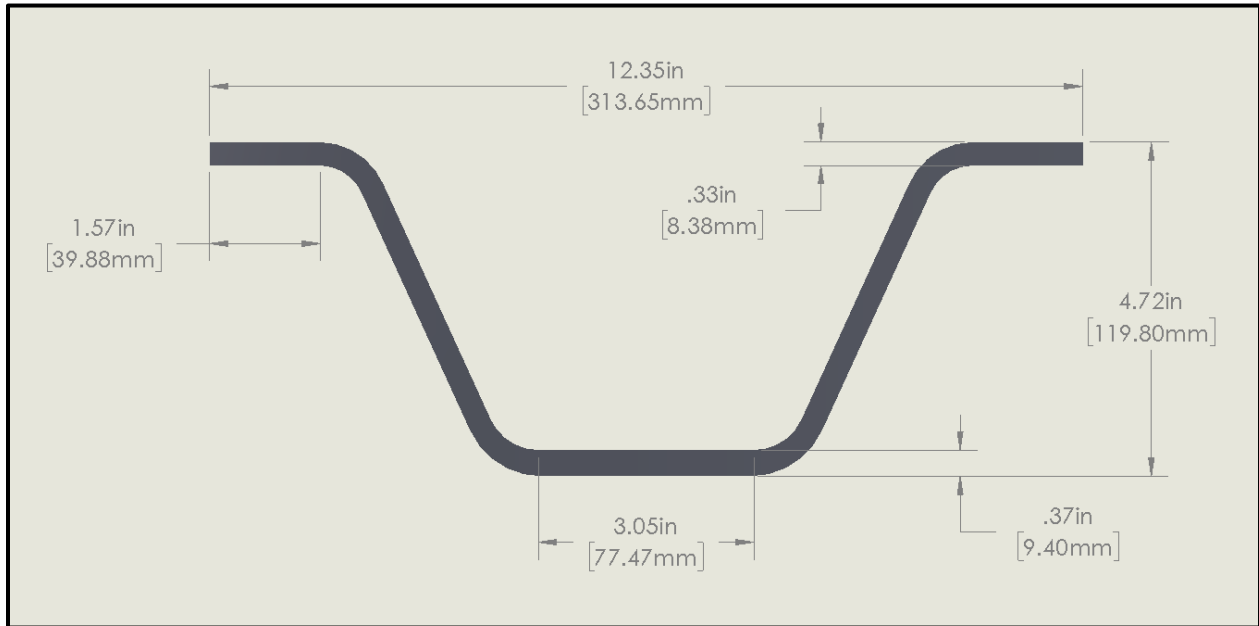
Dimensioning of Formed Corrugated Sections with Tentative Dimensioning
